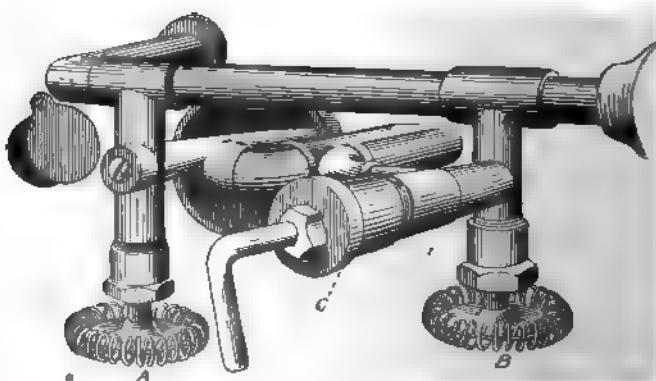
Showing the torch in position. By reference to Fig. 396, it may be readily understood that the head of the torch, C, is attached to a nipple on B by screw, G; the bent tube being thrust through a port in the burner casing so as to come directly over the fire, the nozzle entering the mixing tube by the side of the nozzle on the main valve, A.
